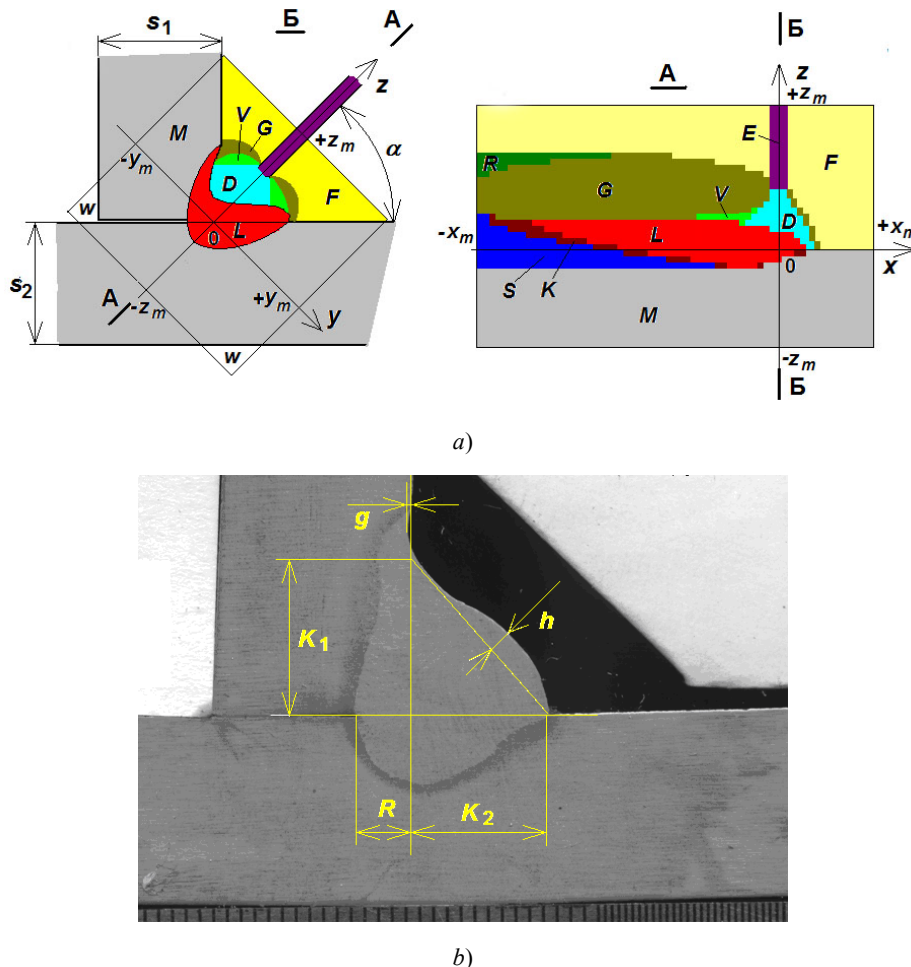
Structure of the simulation space for the welding process (a), and the geometric dimensions of fillet welds (b), which determine the quality of their formation
